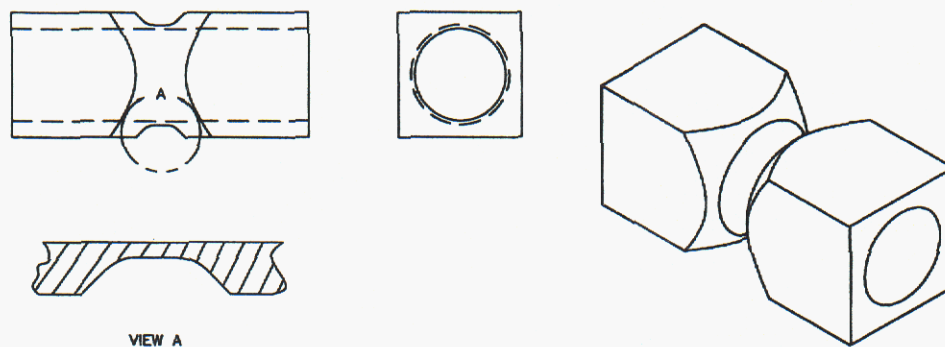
Torsional Kolsky bar specimen with 45° shoulders at edge of gage section (see View A).
